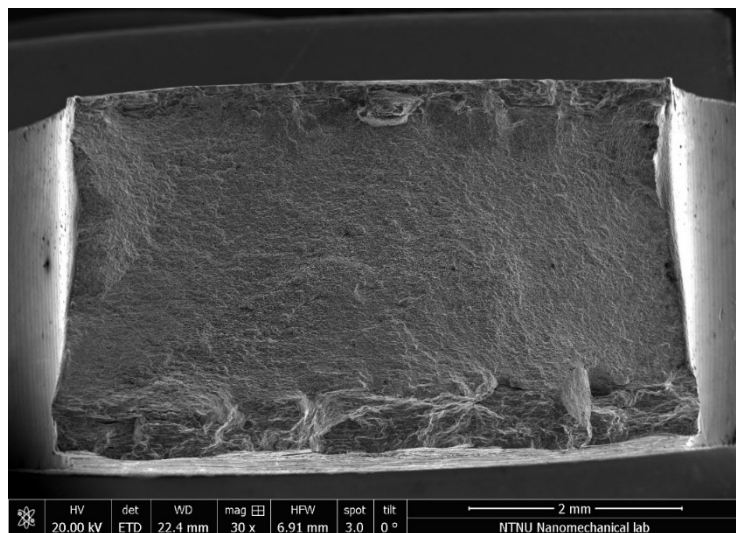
Additional SEM image of the fracture surfaces at low magnification for a selected tensile test specimen. Specimen code: BMT5. Magnification 30x.
